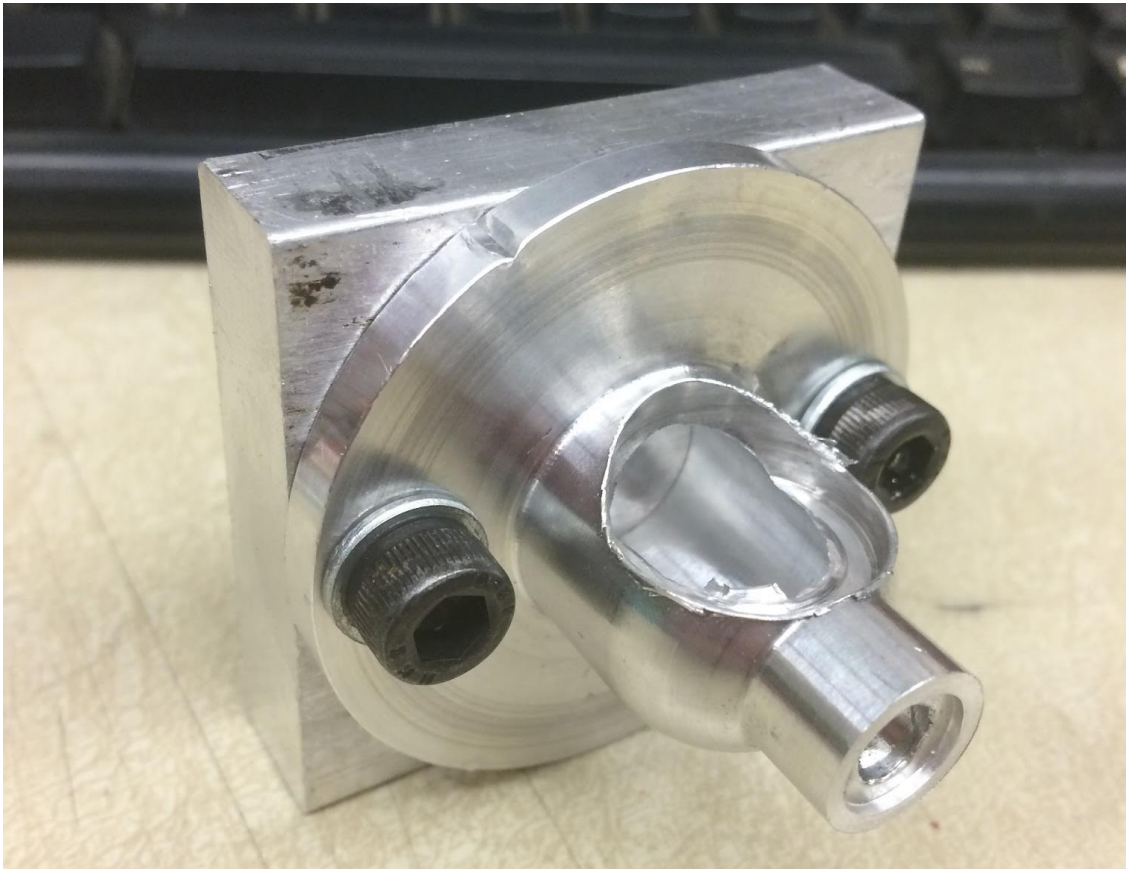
The hole bored out of the side of the port for a $\frac{3}{4}$ " tube.
